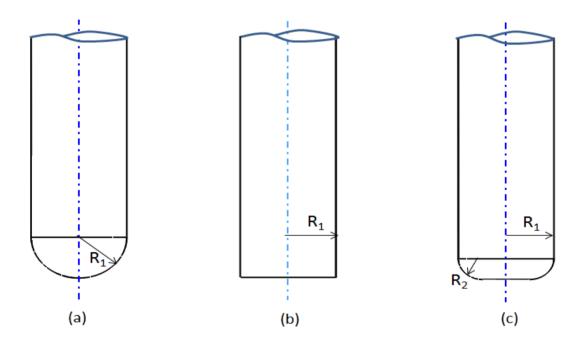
(a) ball nose (b) flat end (c) toroidal end mill
